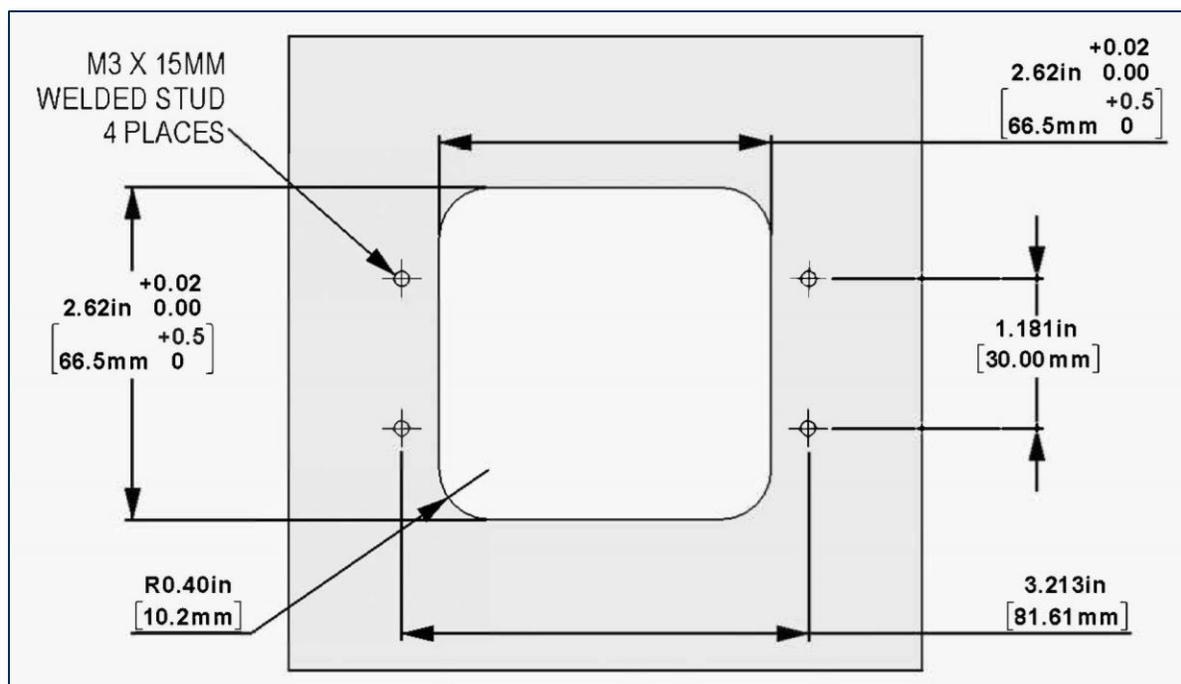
DynaWave Panel Cutout Dimensions in Inches [mm]
